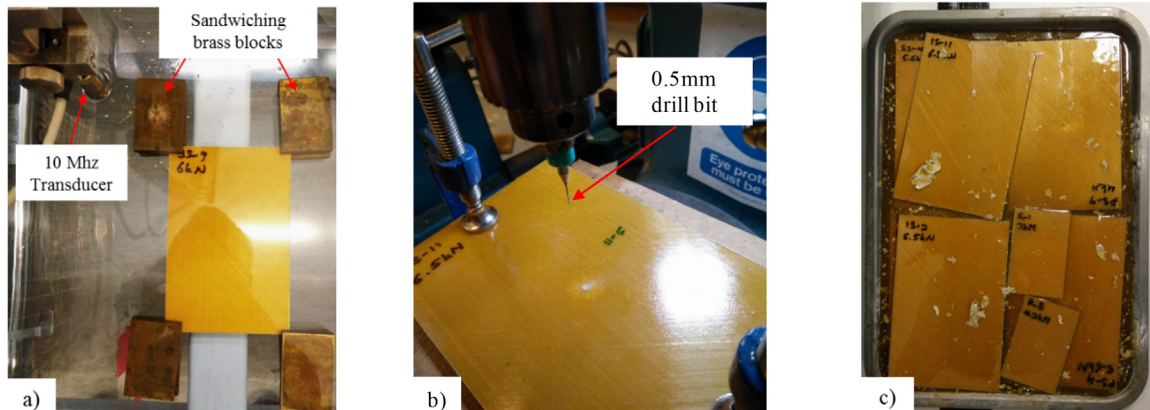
a) Top view of the C-scan tank; b) Drilling the centre of a tested sample using a 0.5 mm drill bit; c) Dye penetrant bath of drilled samples.
